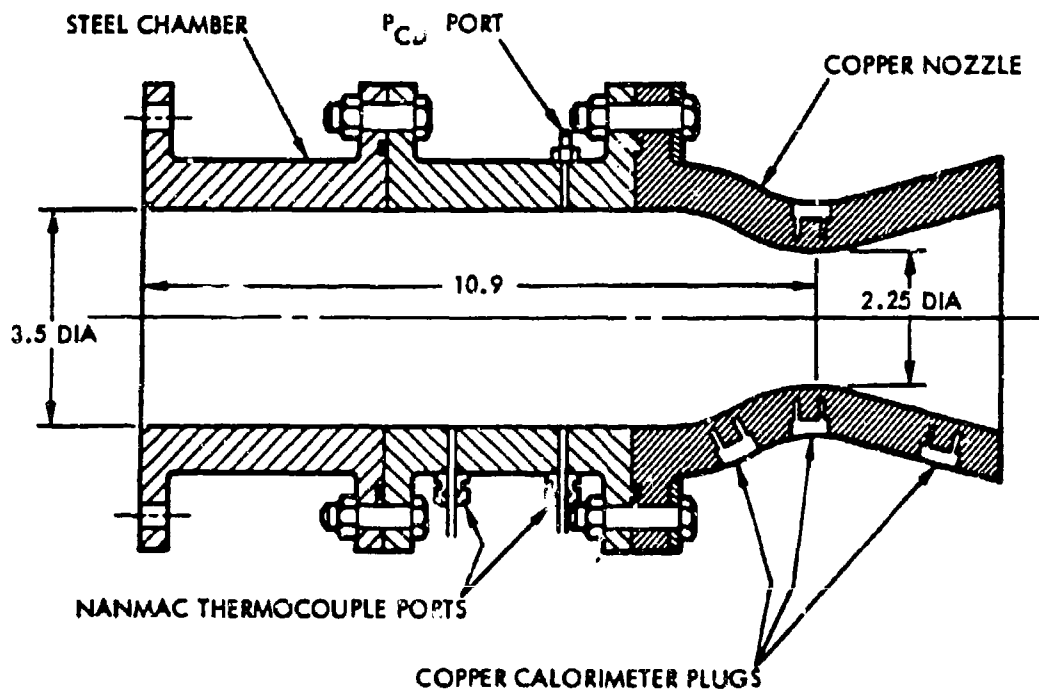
1500 lbf Heat Sink Thrust Chamber Assembly Used for the Injector Characterization Firings (U)
